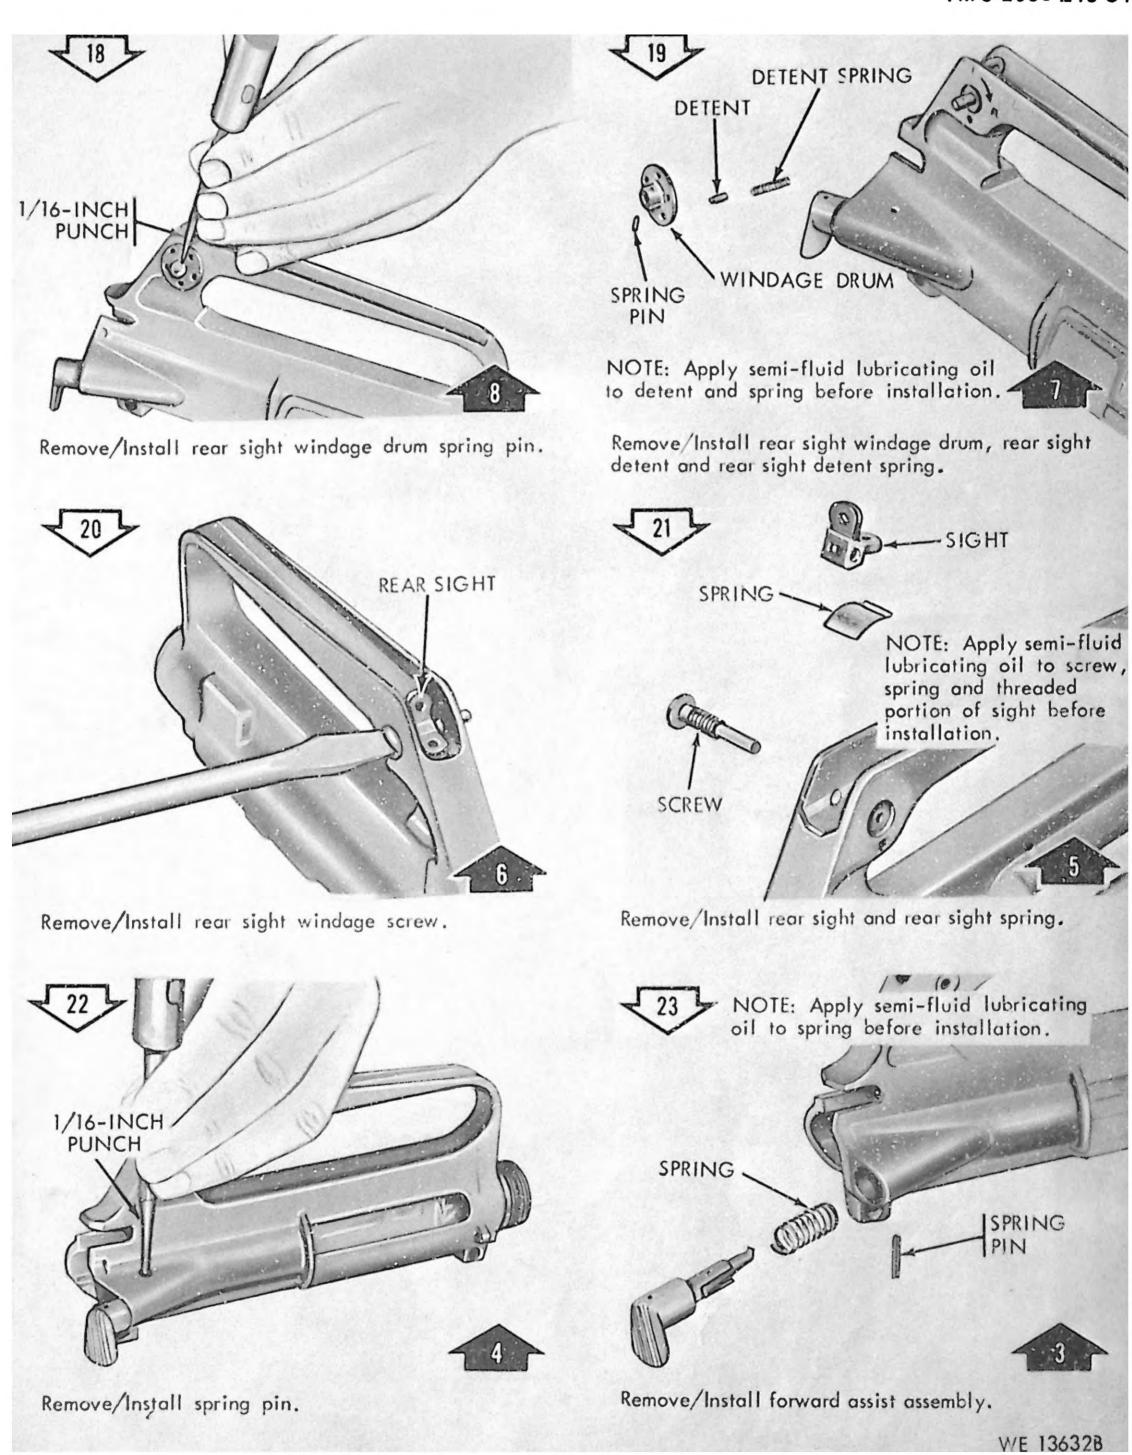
Disassembly/assembly of upper receiver group. (5 of 6)
